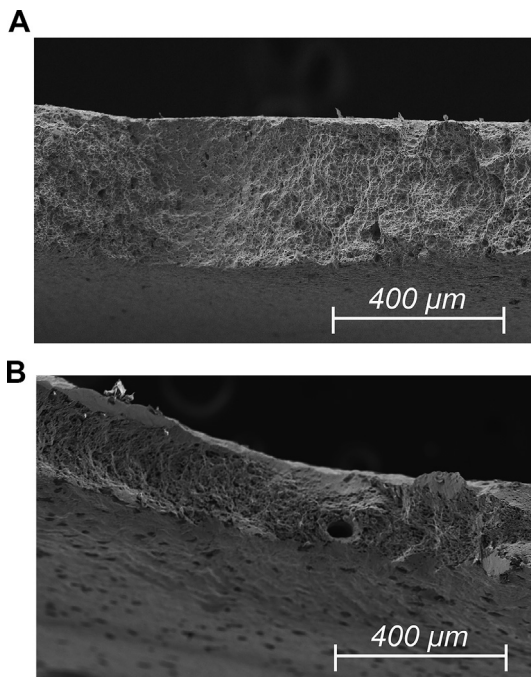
Fractography of fracture surfaces: a – welds failure in a ductile-brittle manner, b – base metal failure in a ductile manner.
